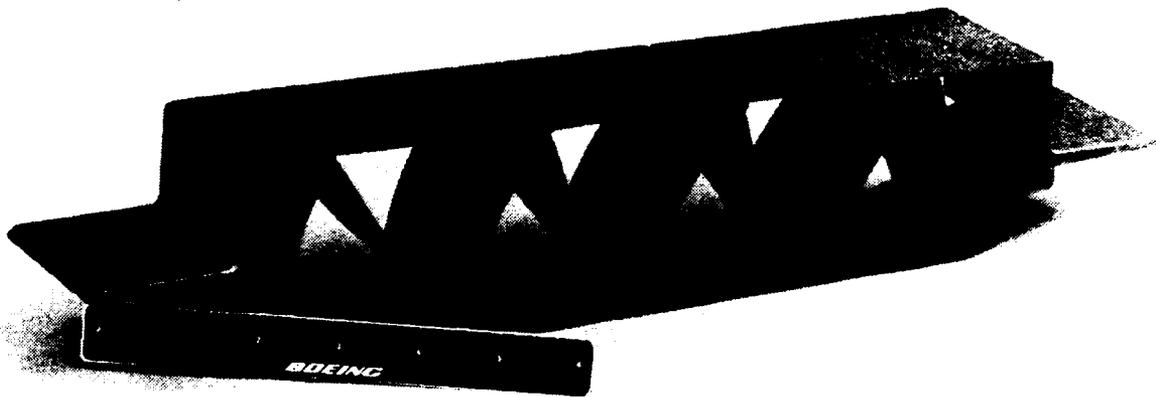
Photograph of a SPF laser welded titanium alloy airfoil section.
